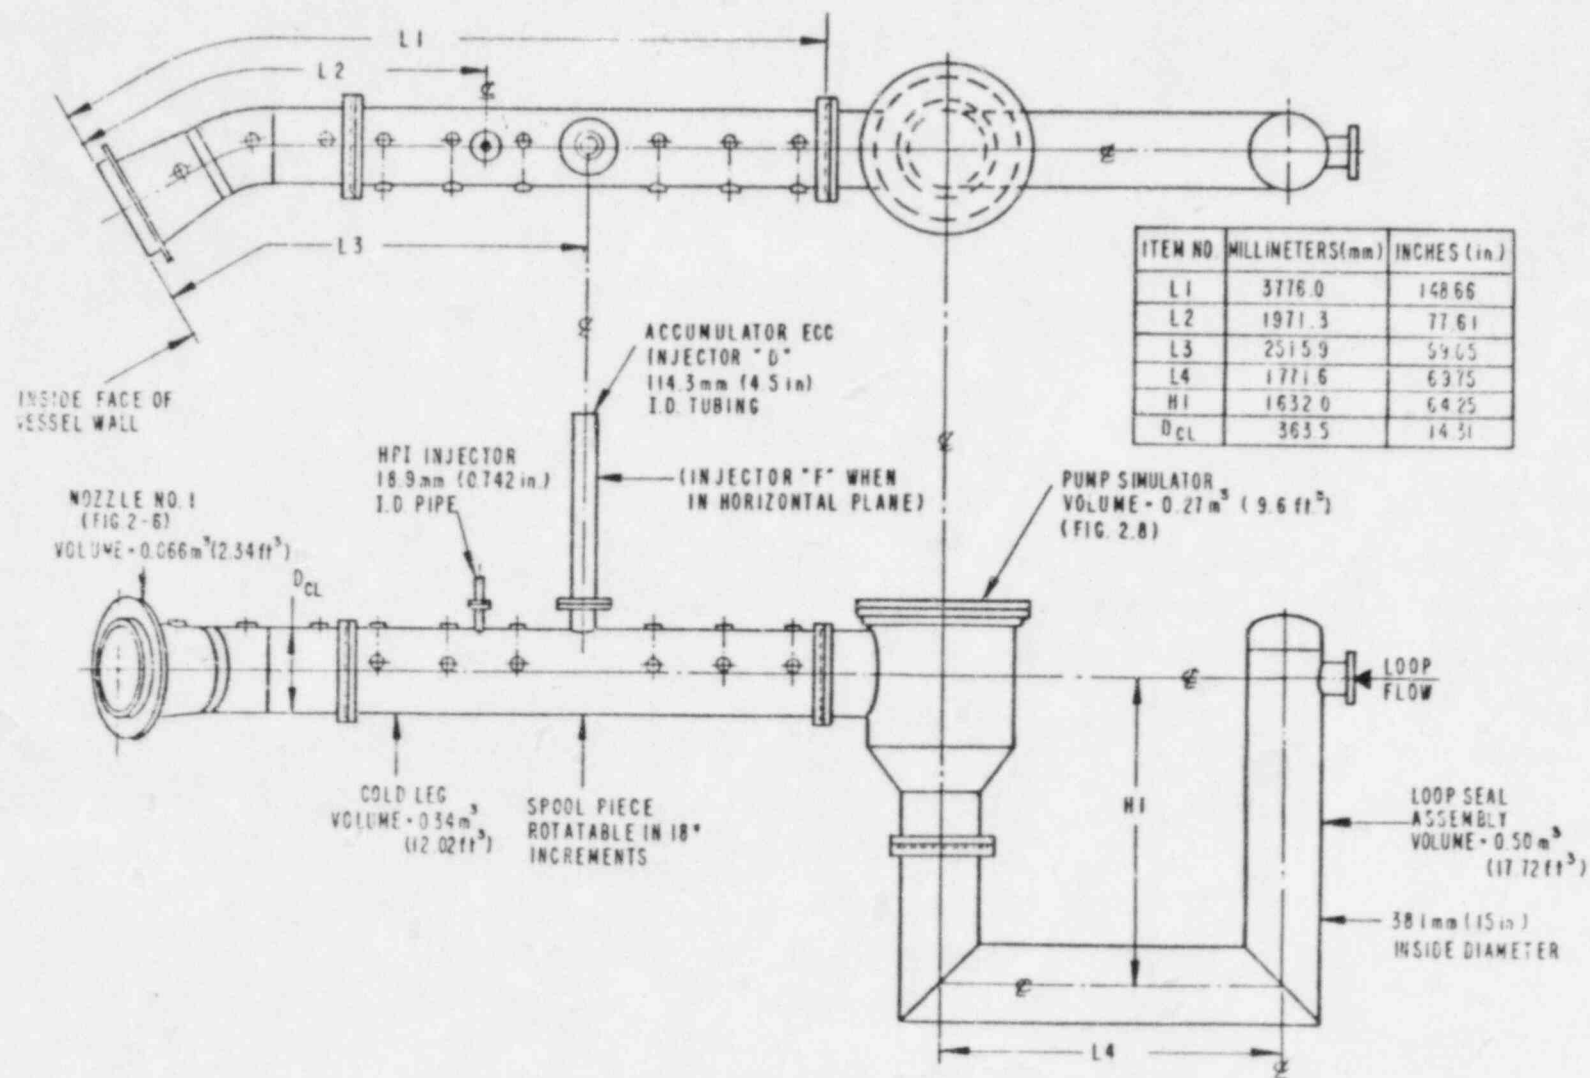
Horizontal Cold Leg Assembly Number 2
